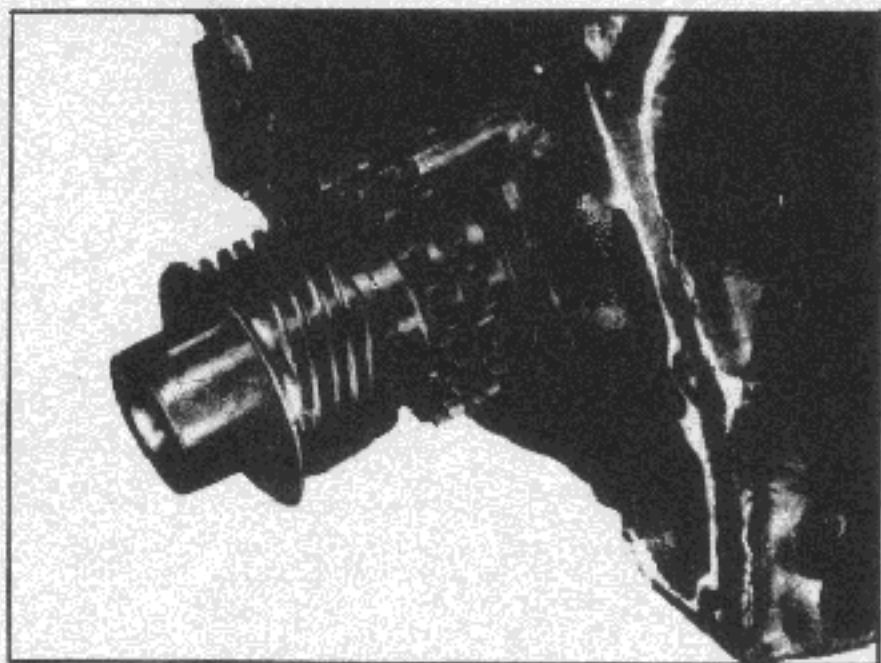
Crankshaft sprocket and distributor drive gear
